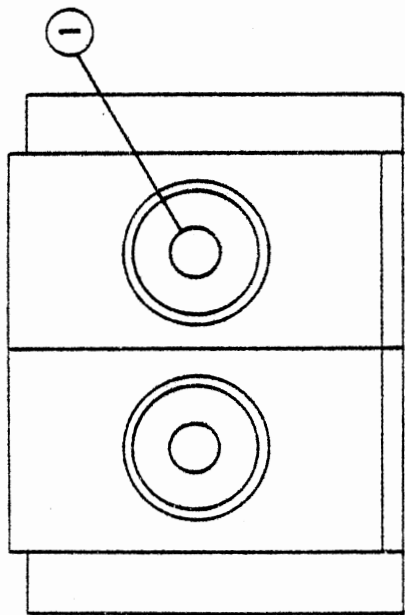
Detailed Mechanical Drawing of Photoacoustic Cell Assembly
